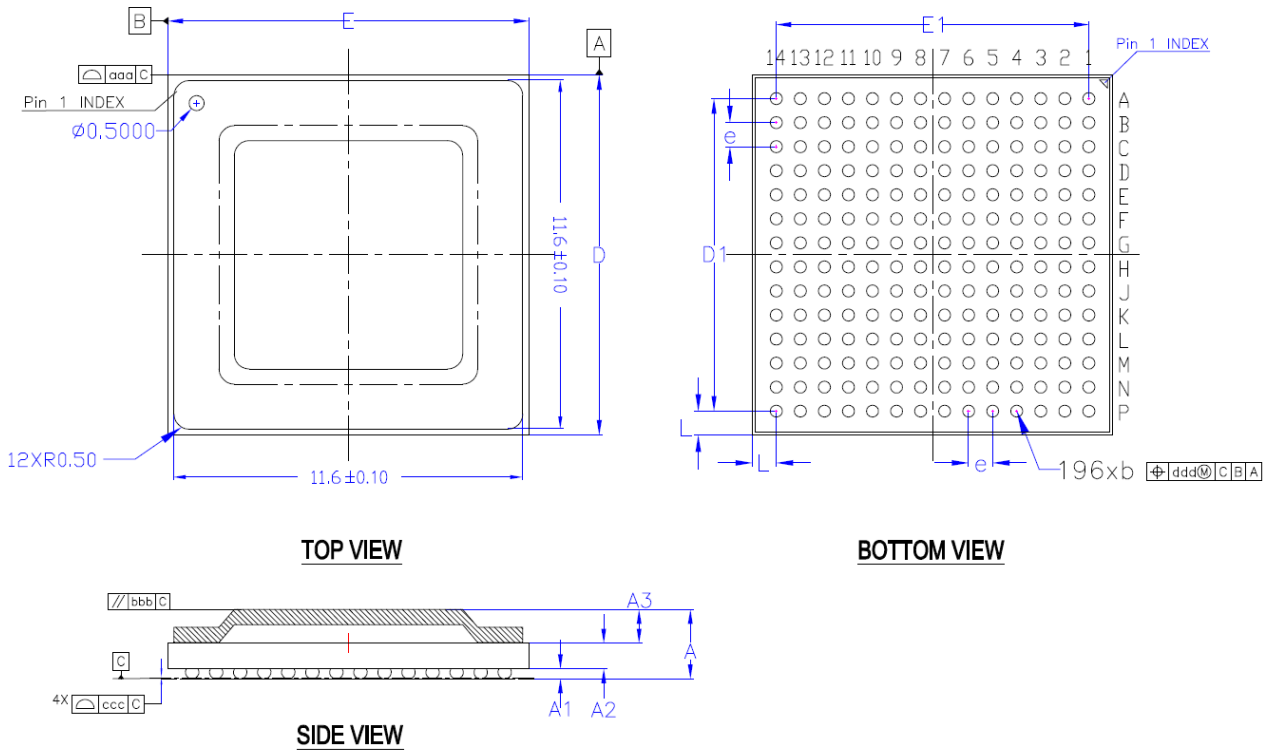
FCBGA196 Package Dimensional Diagram
